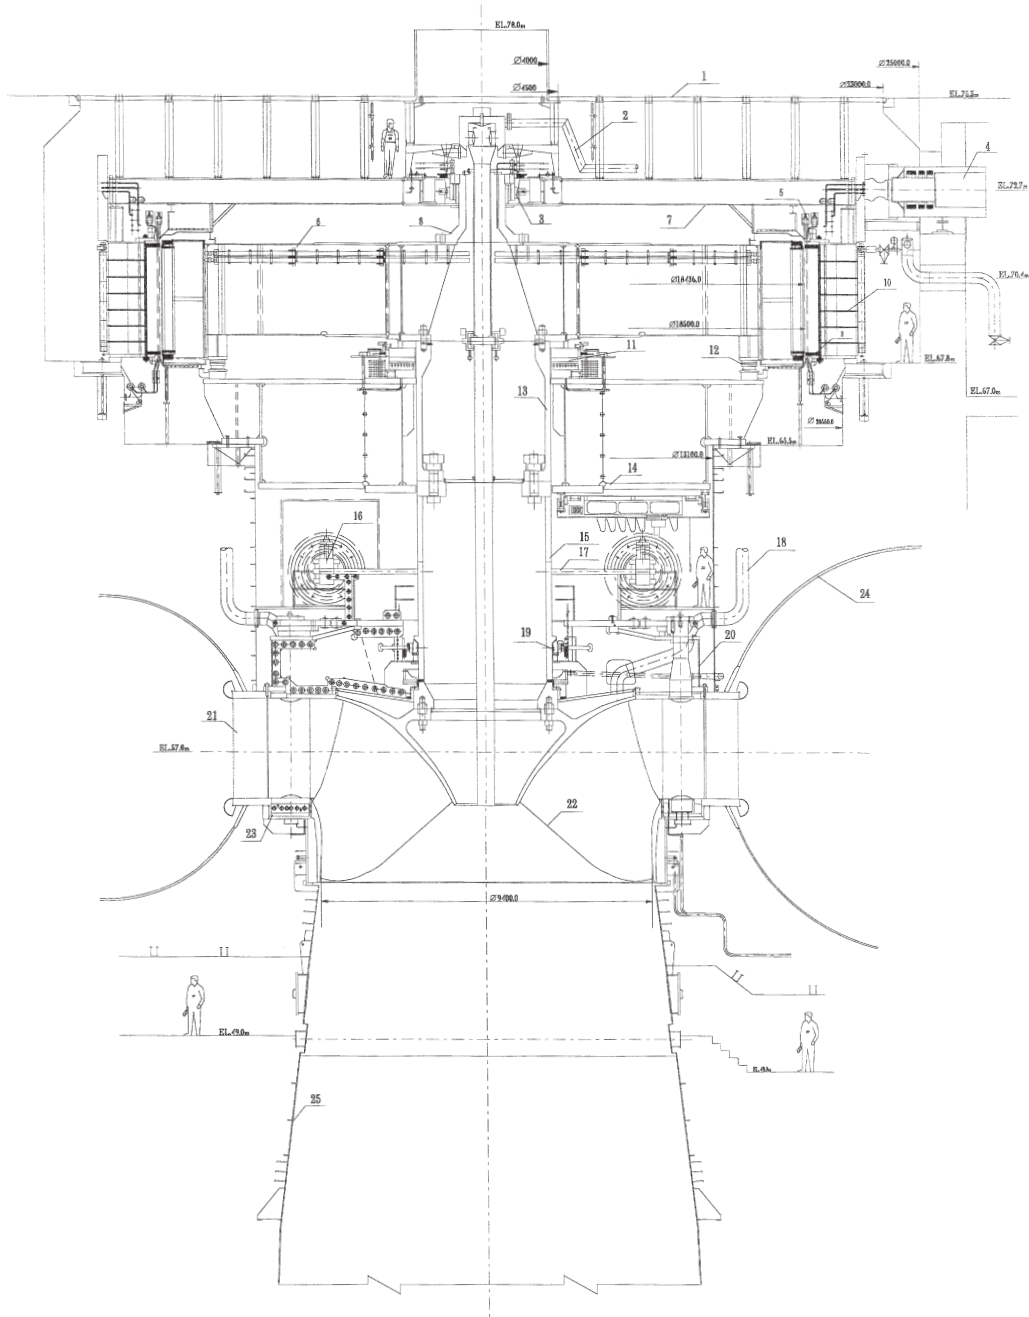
General structure and cross section of the TGP units No. 1-3 and No. 7-9.
